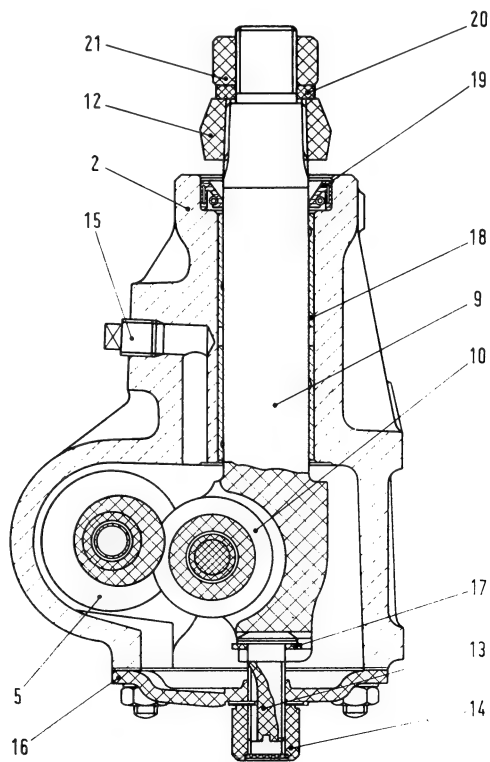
Sectional view of the steering gear across the roller shaft.
